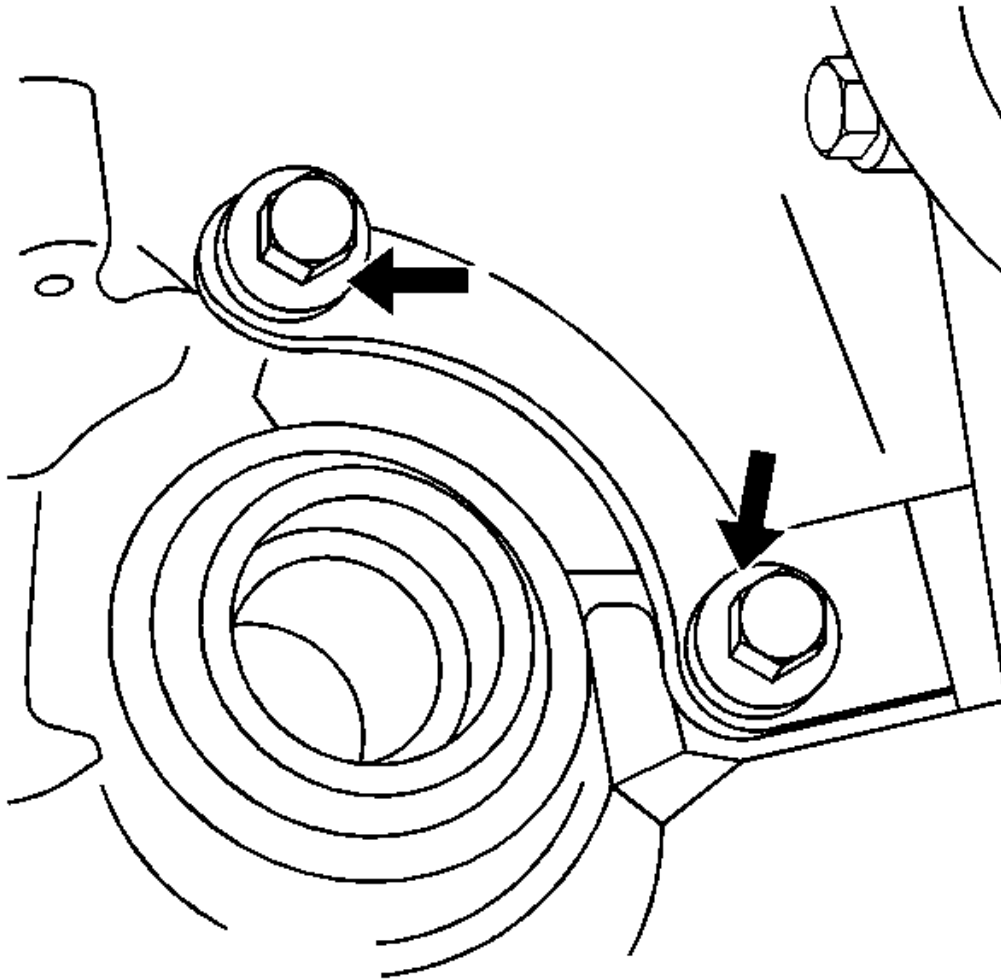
Identifying Transmission-To-Engine Brace Bolts
